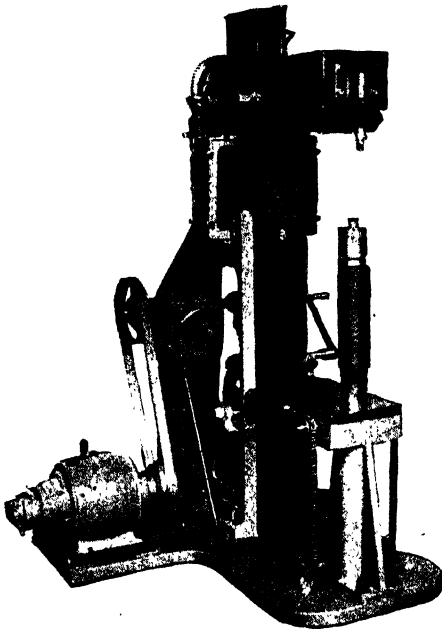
A.—SPOT WELDING MACHINE FOR WELDING CYLINDER ENDS, ETC.
